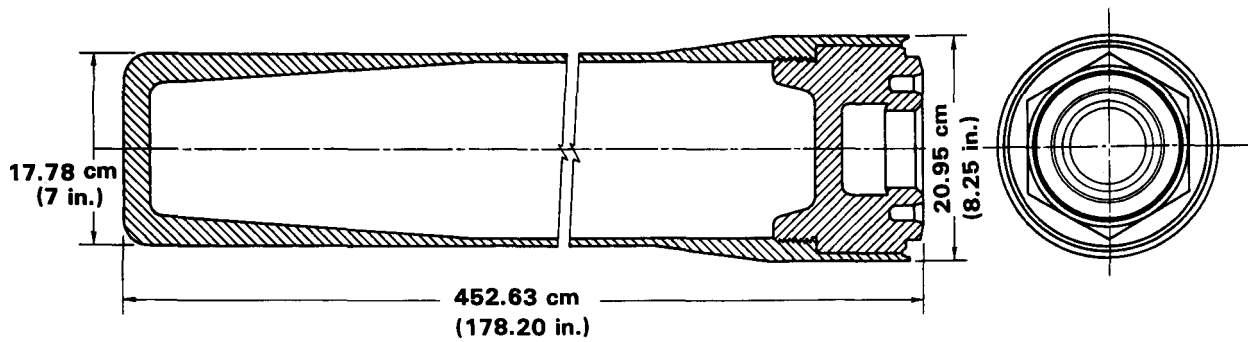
Seal-Welded CRBRP Spent Fuel Canister
